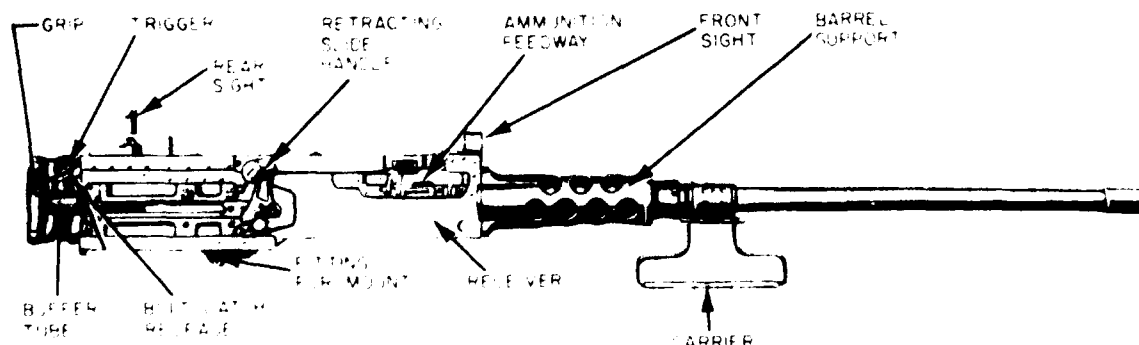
The .50-caliber Browning machine gun (BMG), M2HB.
